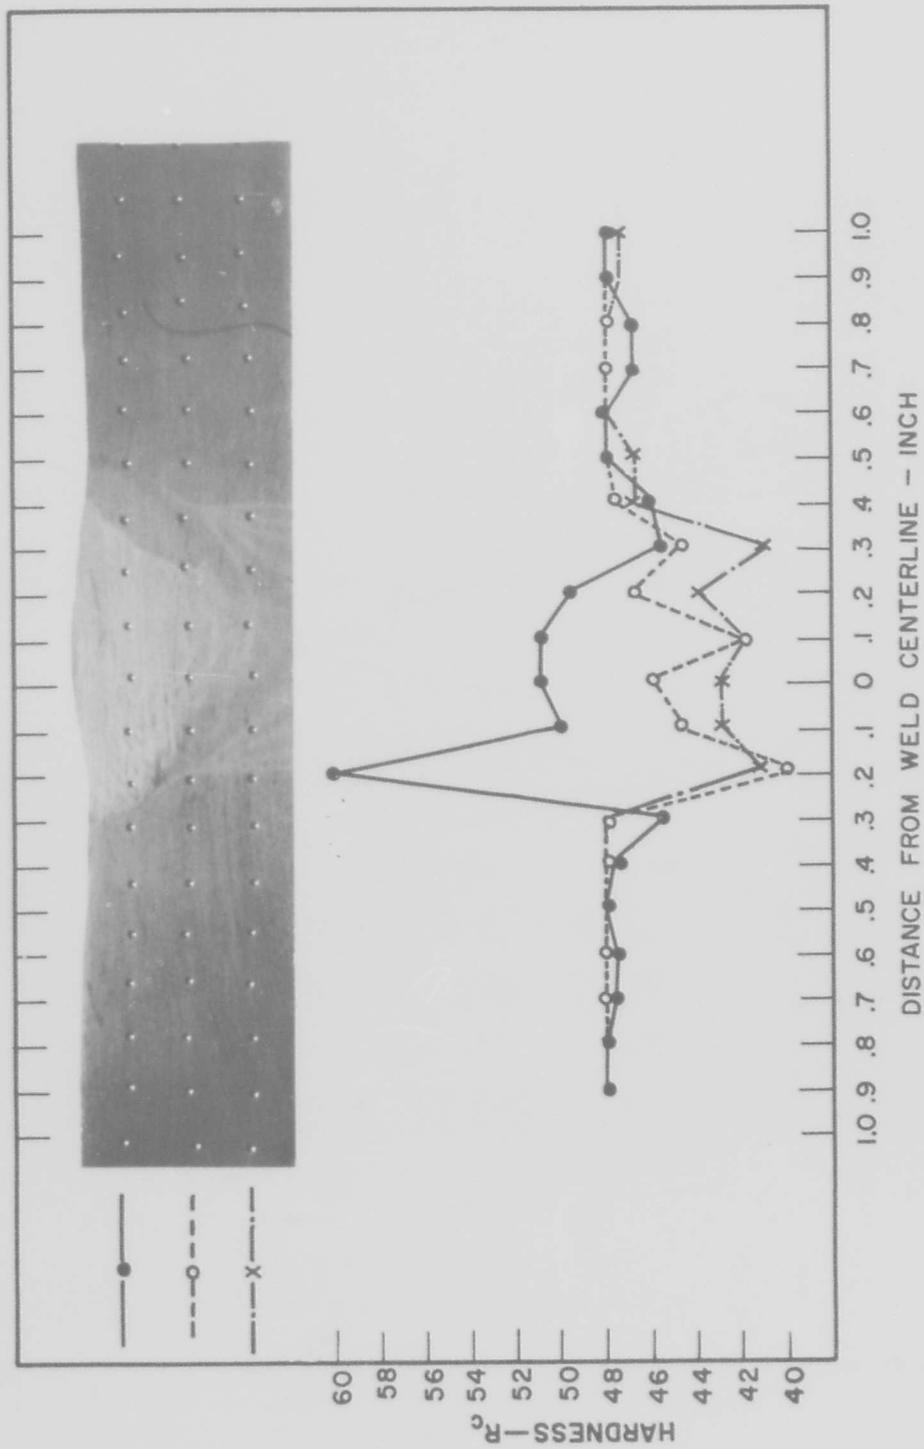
Hardness Survey of TIG Weld No. K290 Made in D6AC Plate at 4 ipm Using Helium Shielding, Filler Wire No. 1, and a 400°F Preheat and Interbead Temperature.
